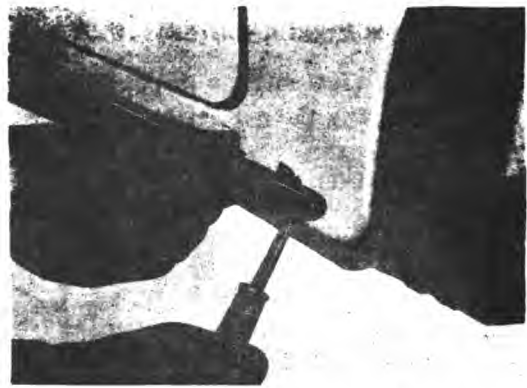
Removing and Reinstalling metal molding (door)      Fig. 13-125 Removing and Reinstalling side seal metal molding
